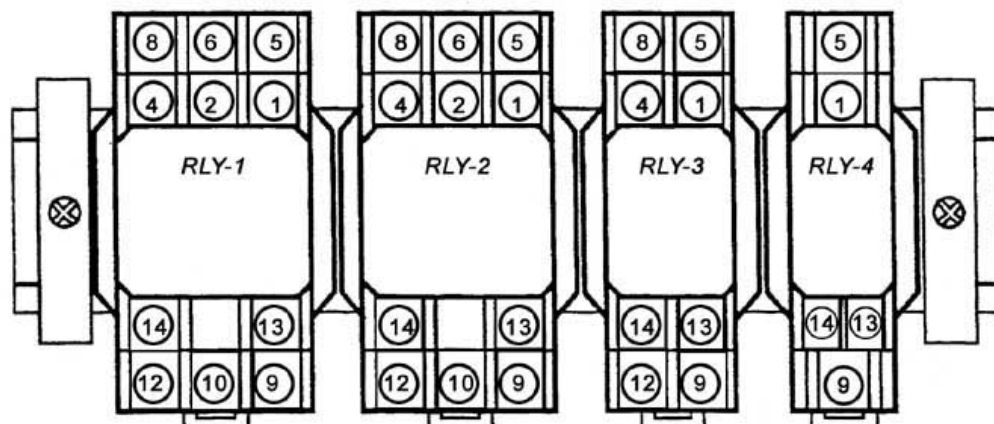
ELECTRICAL PANEL ASSEMBLY
